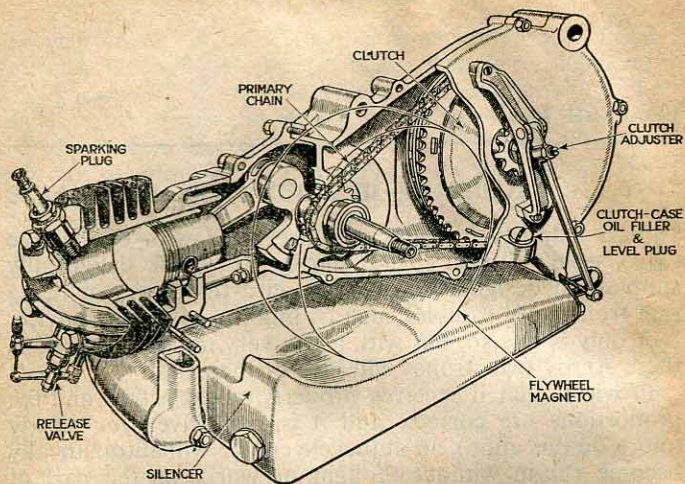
A part-sectional drawing of the Villiers Junior-de-luxe autocycle unit
